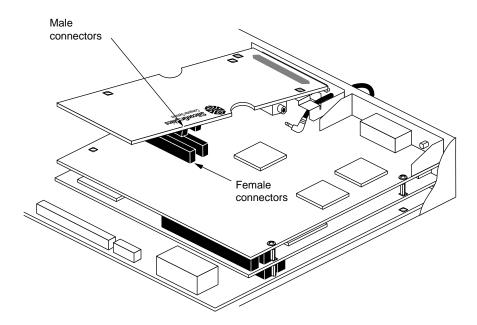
Positioning the Indy Presenter XZ Adapter Board
